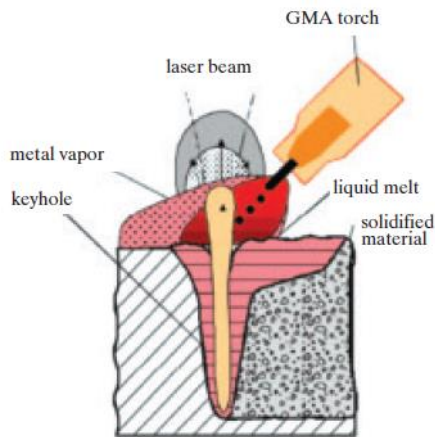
Hybrid laser arc welding (Defalco, 2007)
